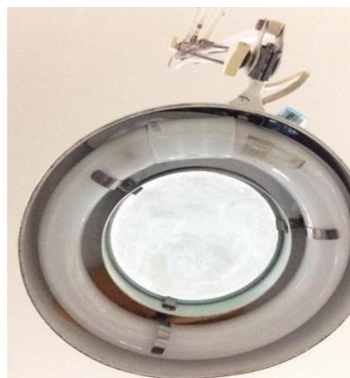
Lower Display of The Existing Inspection Tool (Light)
